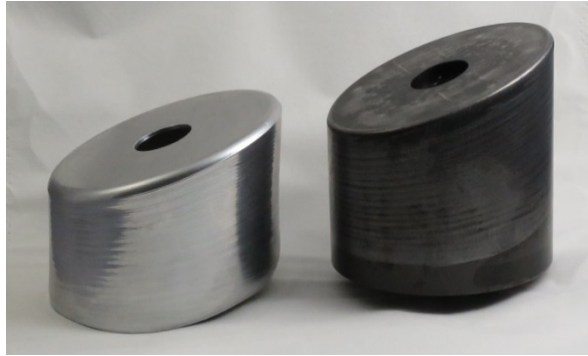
Photograph of formed product of cylindrical cup with oblique bottom (left: formed product, right: mandrel).
